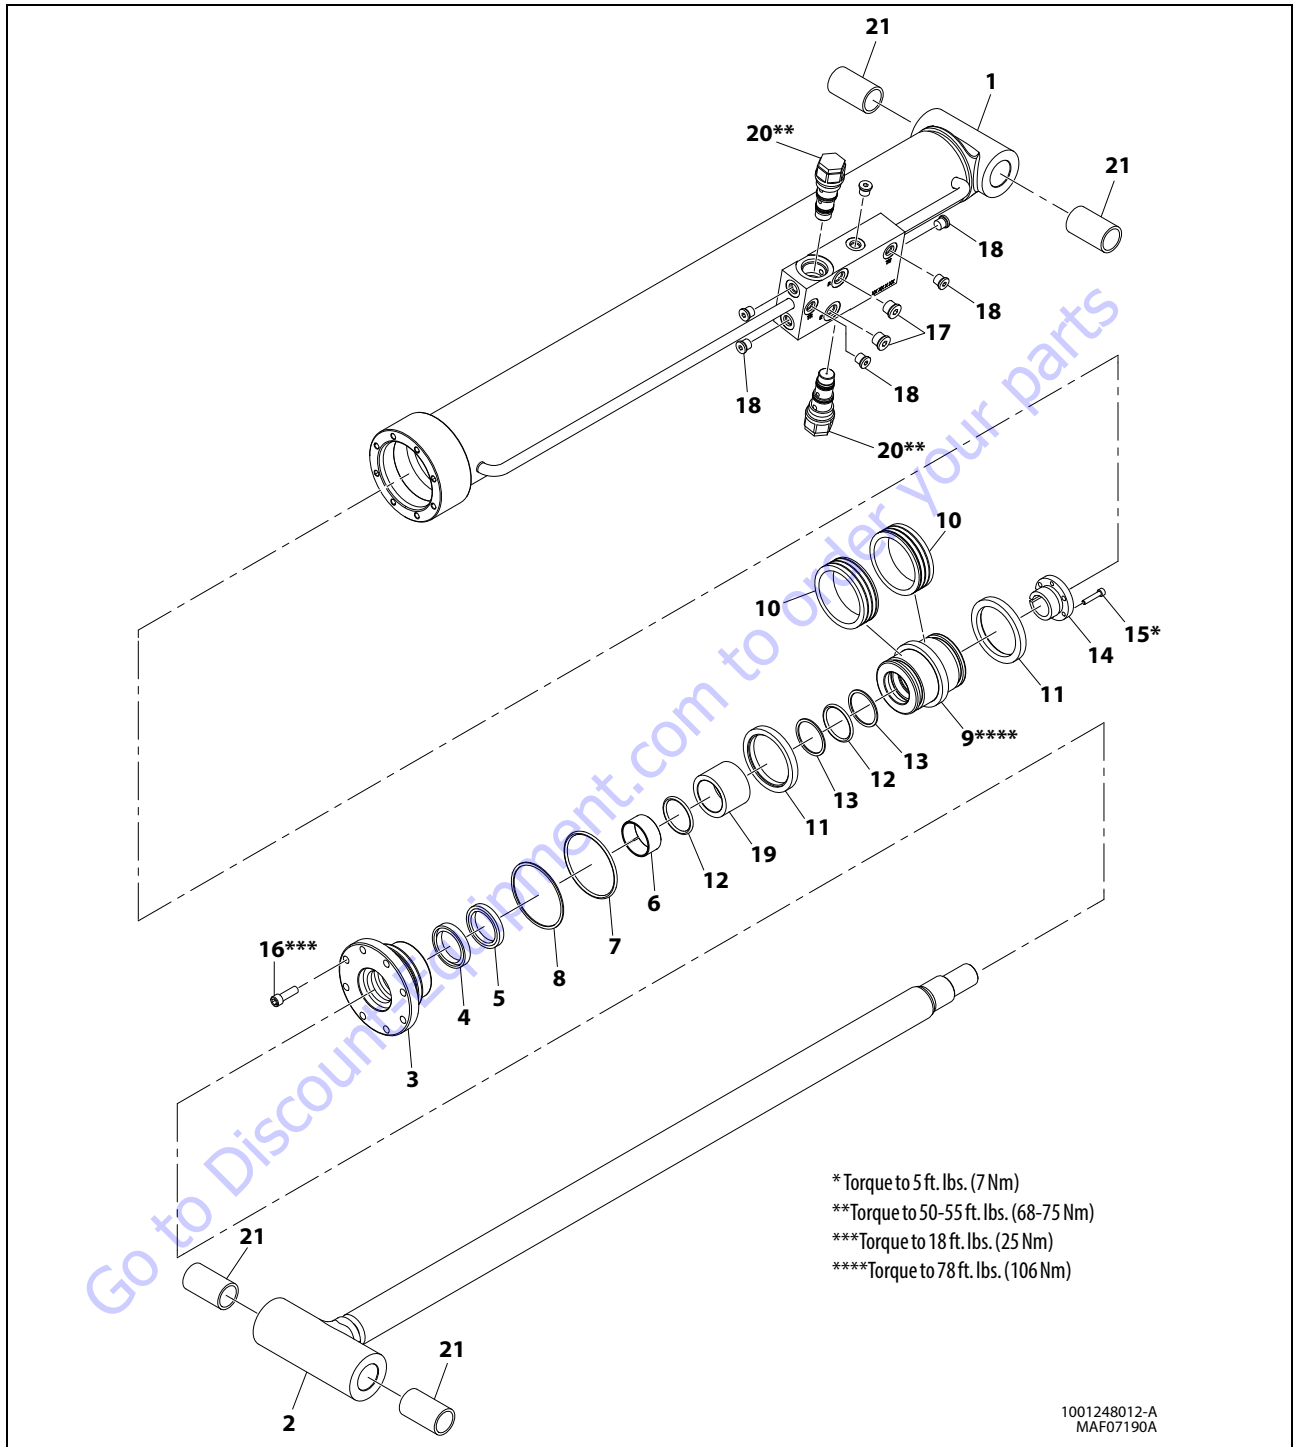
Jib Lift Cylinder (SN 0300183034 through 0300245050)
